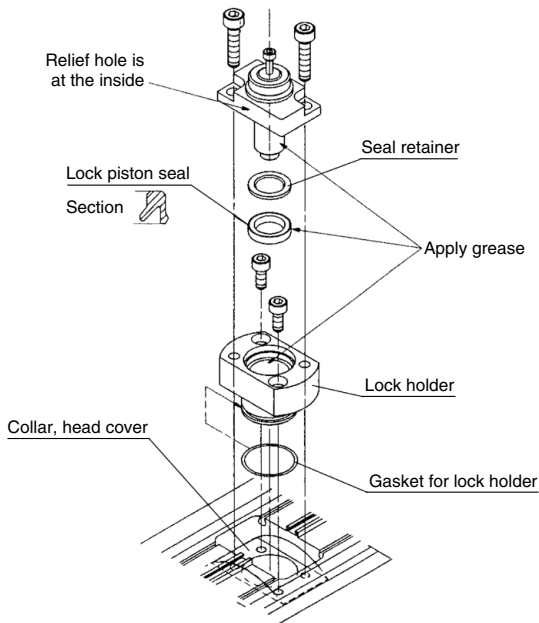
Reassembling of the end lock part (ø20, ø25)
